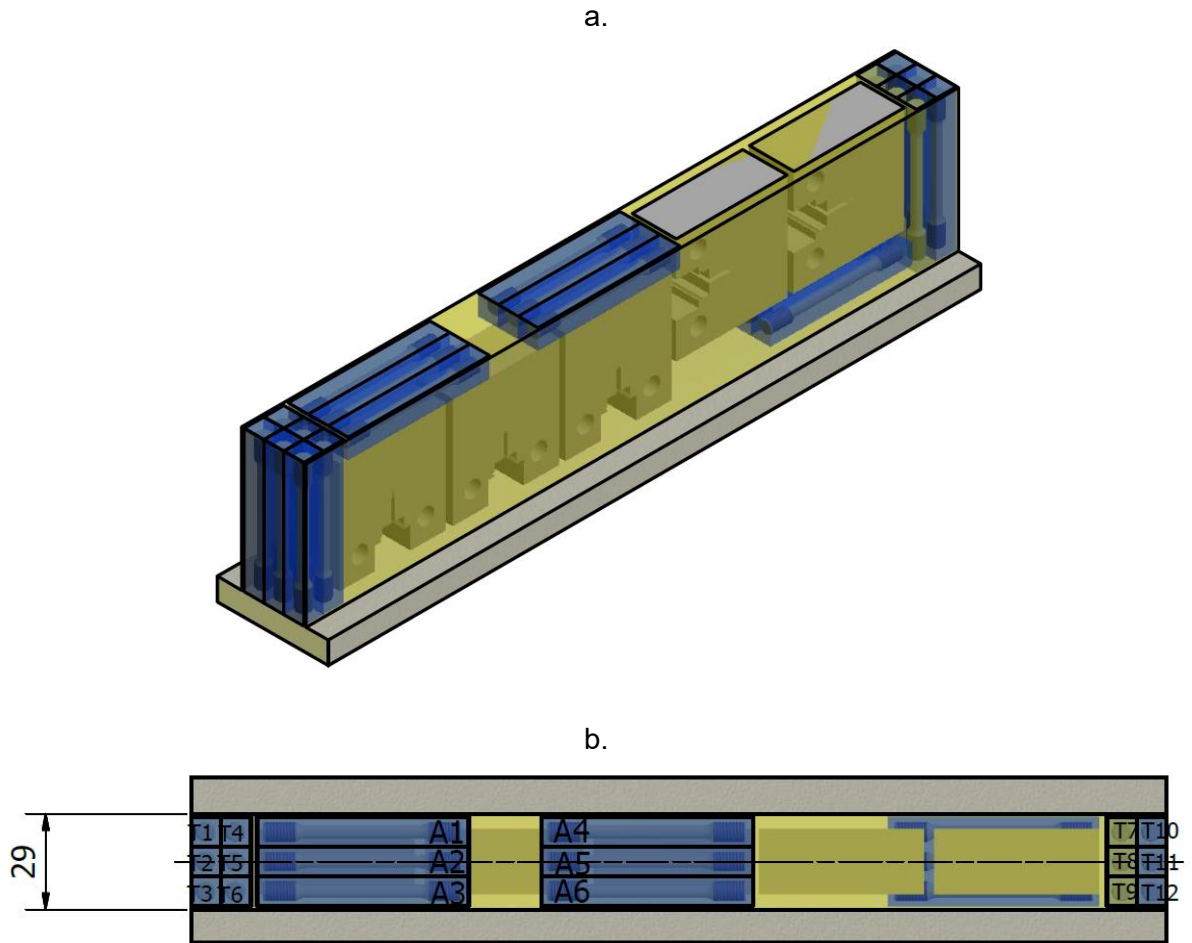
Cutting plan for WAAM Wall 1, (a) 3D view and (b) top view indicating tensile specimen IDs. Detailed list in Table A.2.
